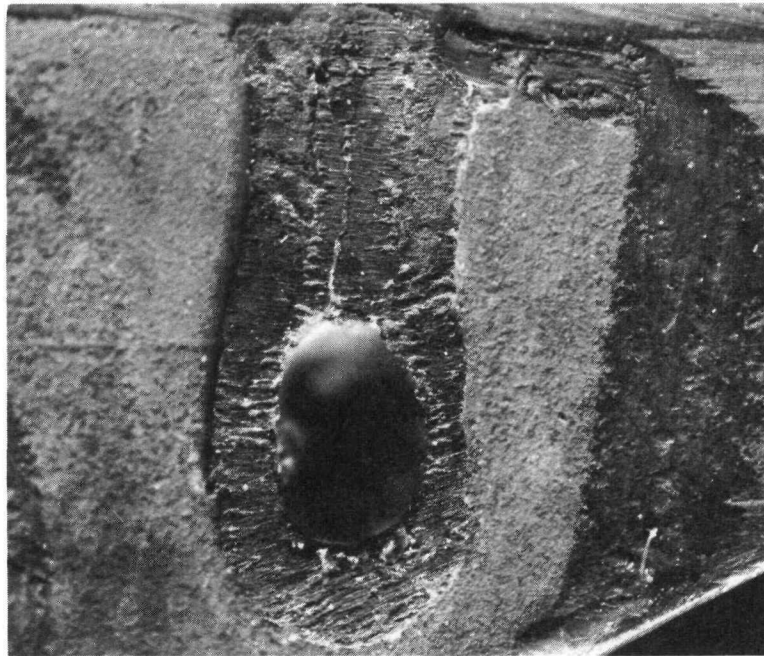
TIG WELD DEFECT IN RENÉ 41 SPECIMEN 1; MAGN 64X
